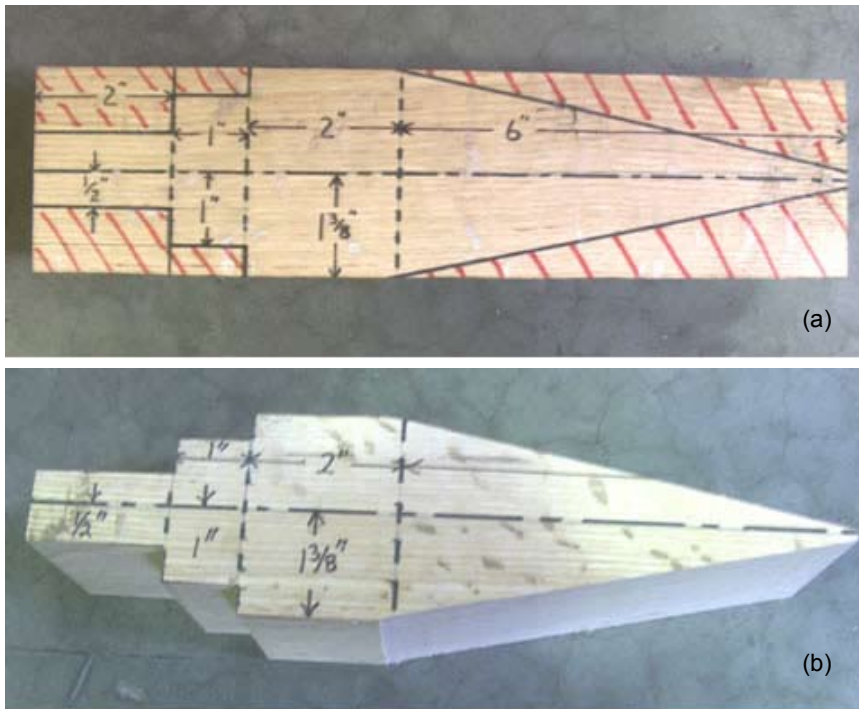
Block of wood (l) for cone-shaped dibble tip. (a) marked with proper dimensions and (b) cut on first plane.
